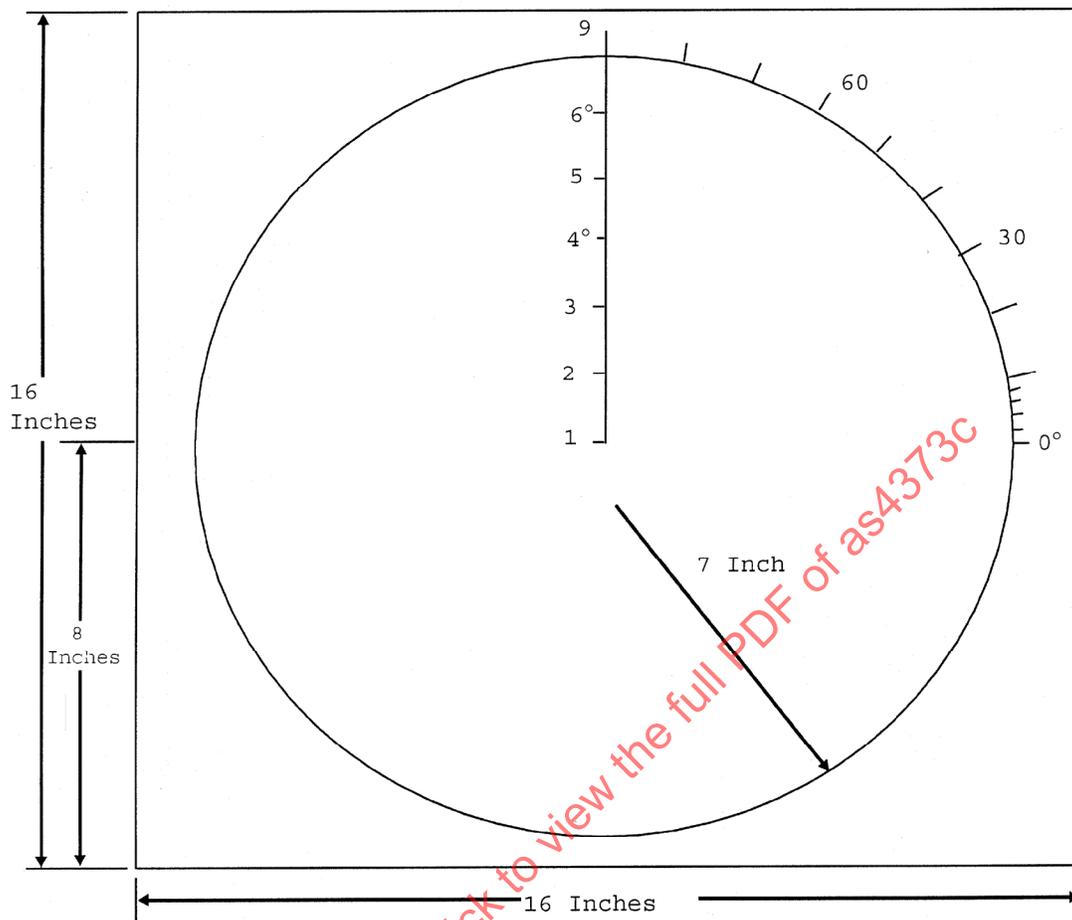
STIFFNESS AND SPRINGBACK TEST FIXTURE BASE PLATE
